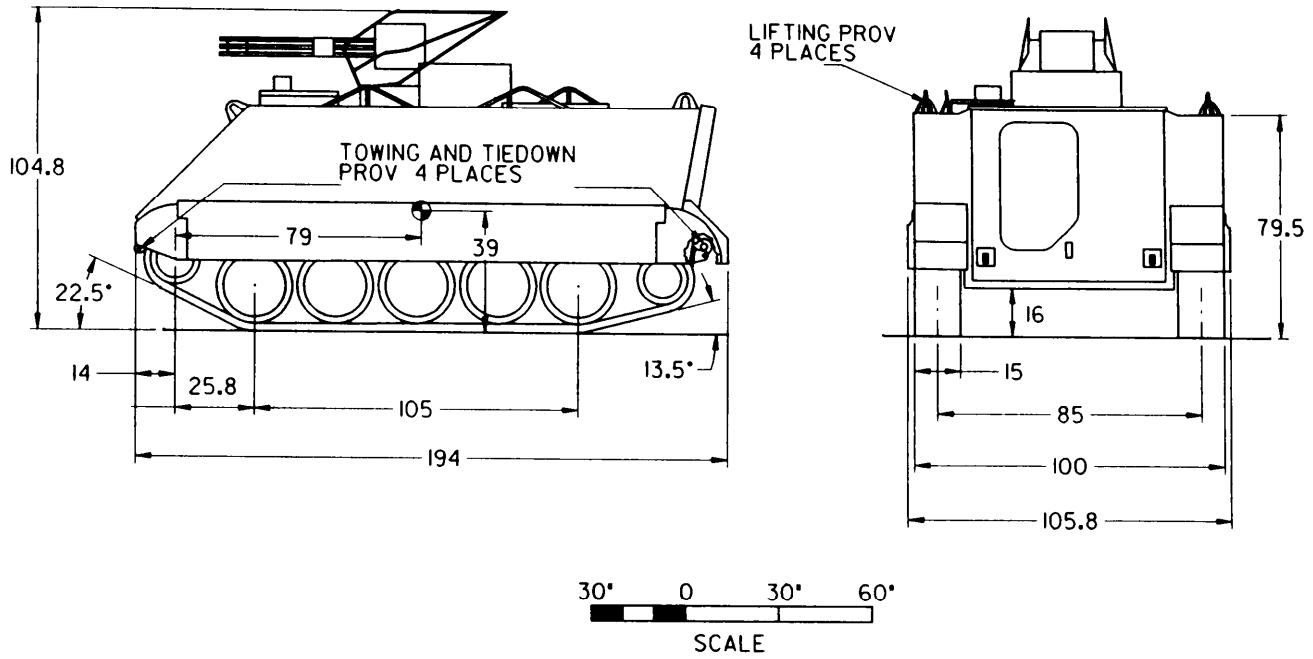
M741A1 Vulcan Air Defense Vehicle. All dimensions are in inches.
